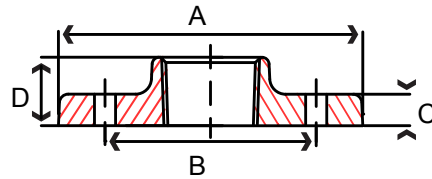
HF1 – 150 lb. Threaded Hydrant Flange
